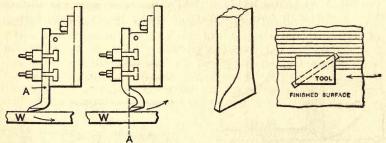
'Cause of Planer Tools Springing into the Work, and Means for Avoiding this
